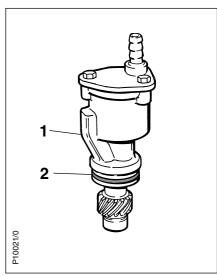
Vacuum pump 7.24808.51.0 for 1.9 I engine
